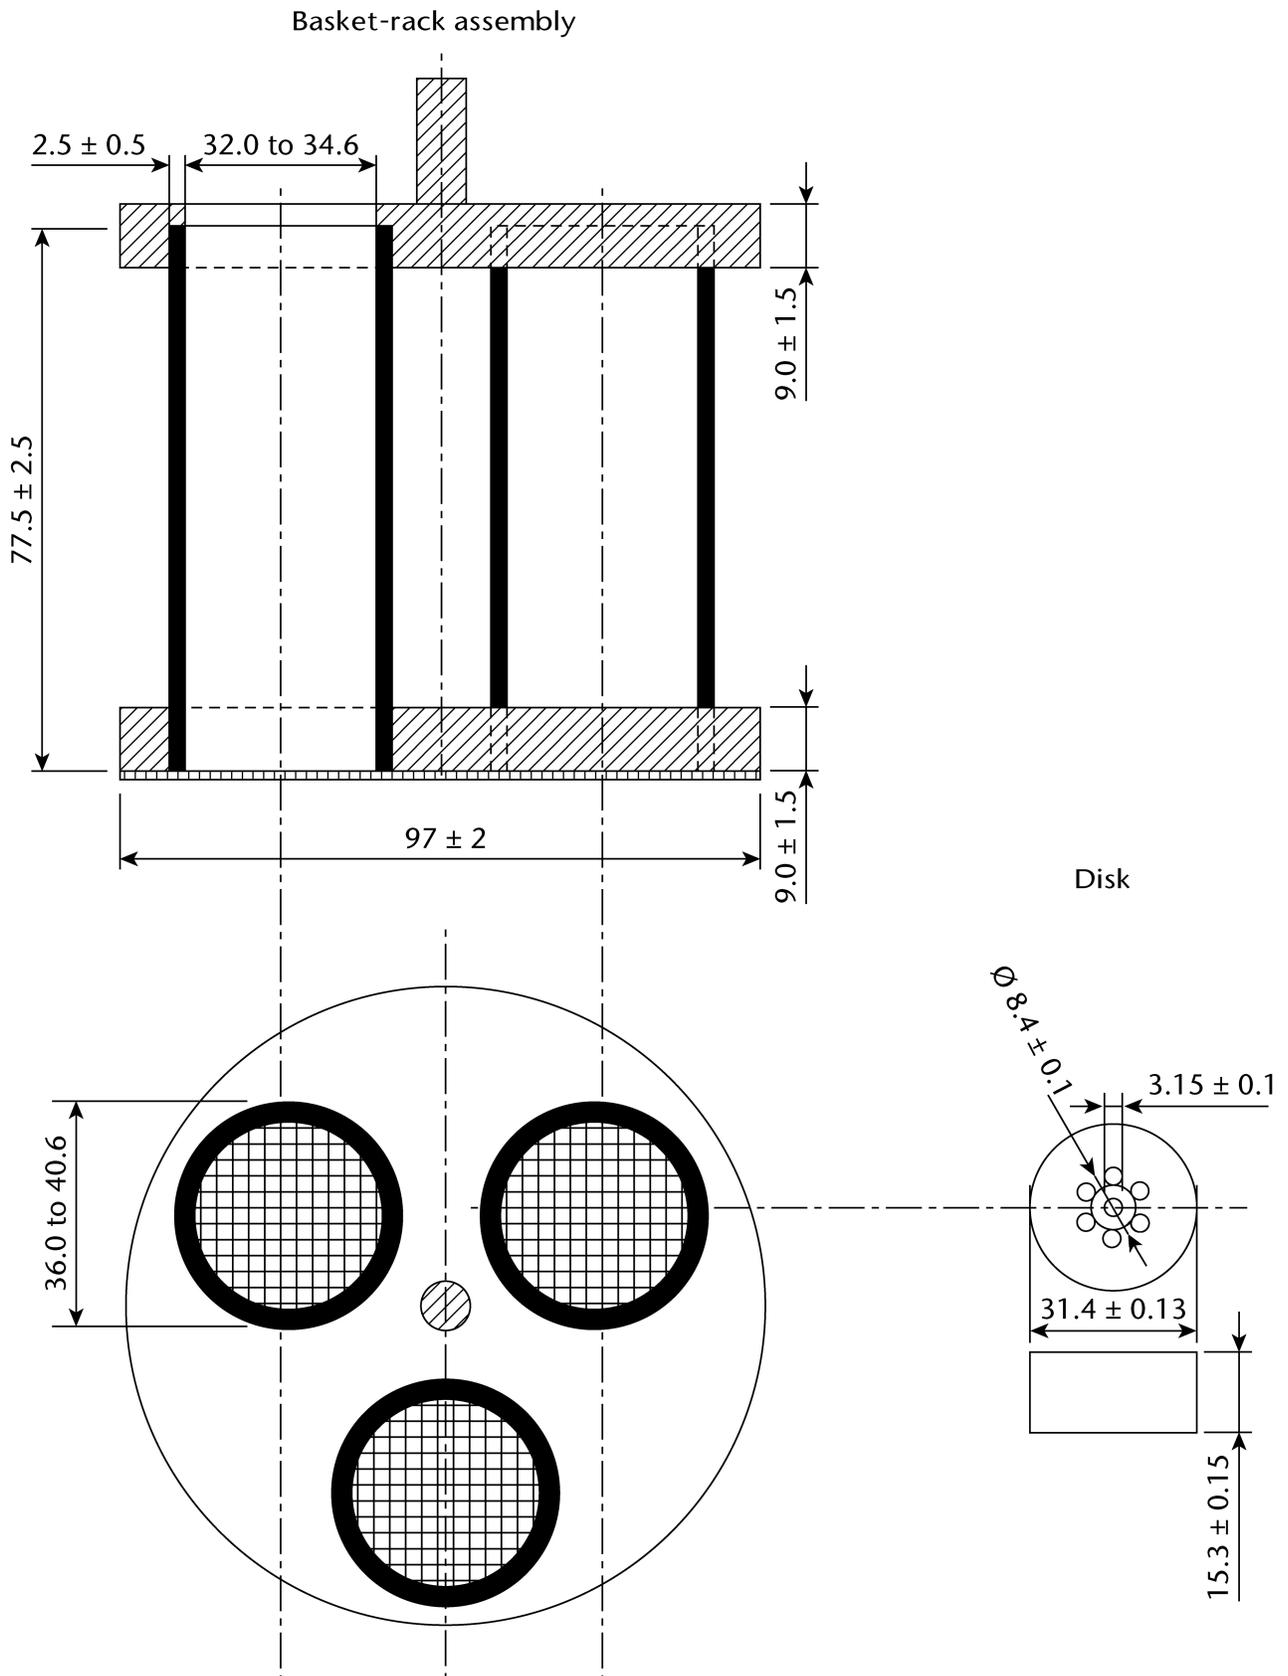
Basket-rack assembly, *Disintegration, Apparatus B* (dimensions in mm).
